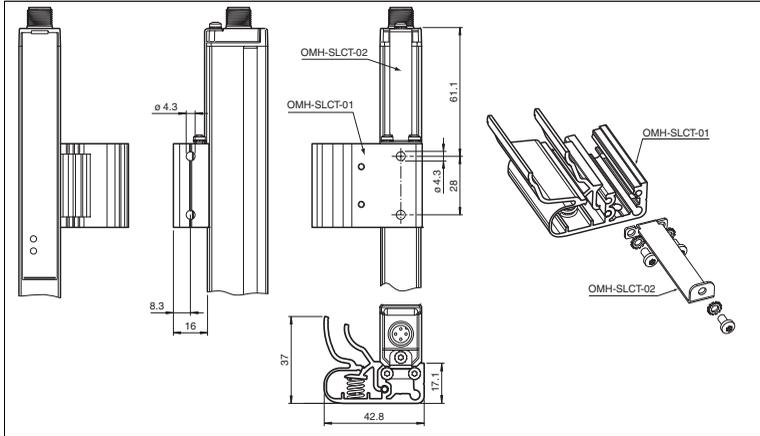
Dimensional drawing and assembly of the mounting aid OMH-SLCT-02
